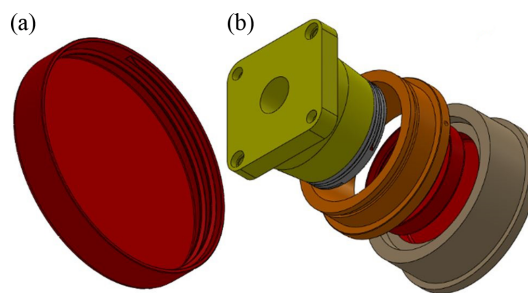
(a) Threaded screw cap part, (b) Representation of the mould insert and part (exploded view)
